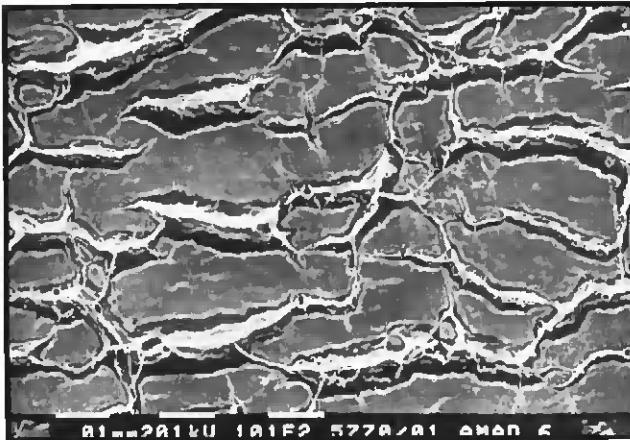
Weld interface surface after fracture, cold roll welding Al-Al with one-sided semibright Ni plating (AMAD),  $Y = 0.603$ .
